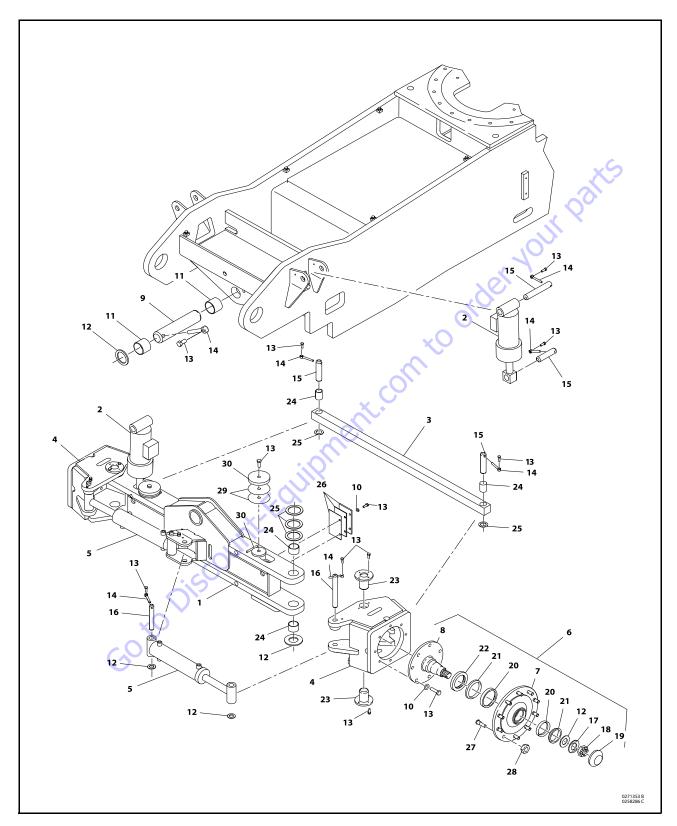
Axle and Steering Installation without Tow Package - Sheet 1 of 2 $\,$
